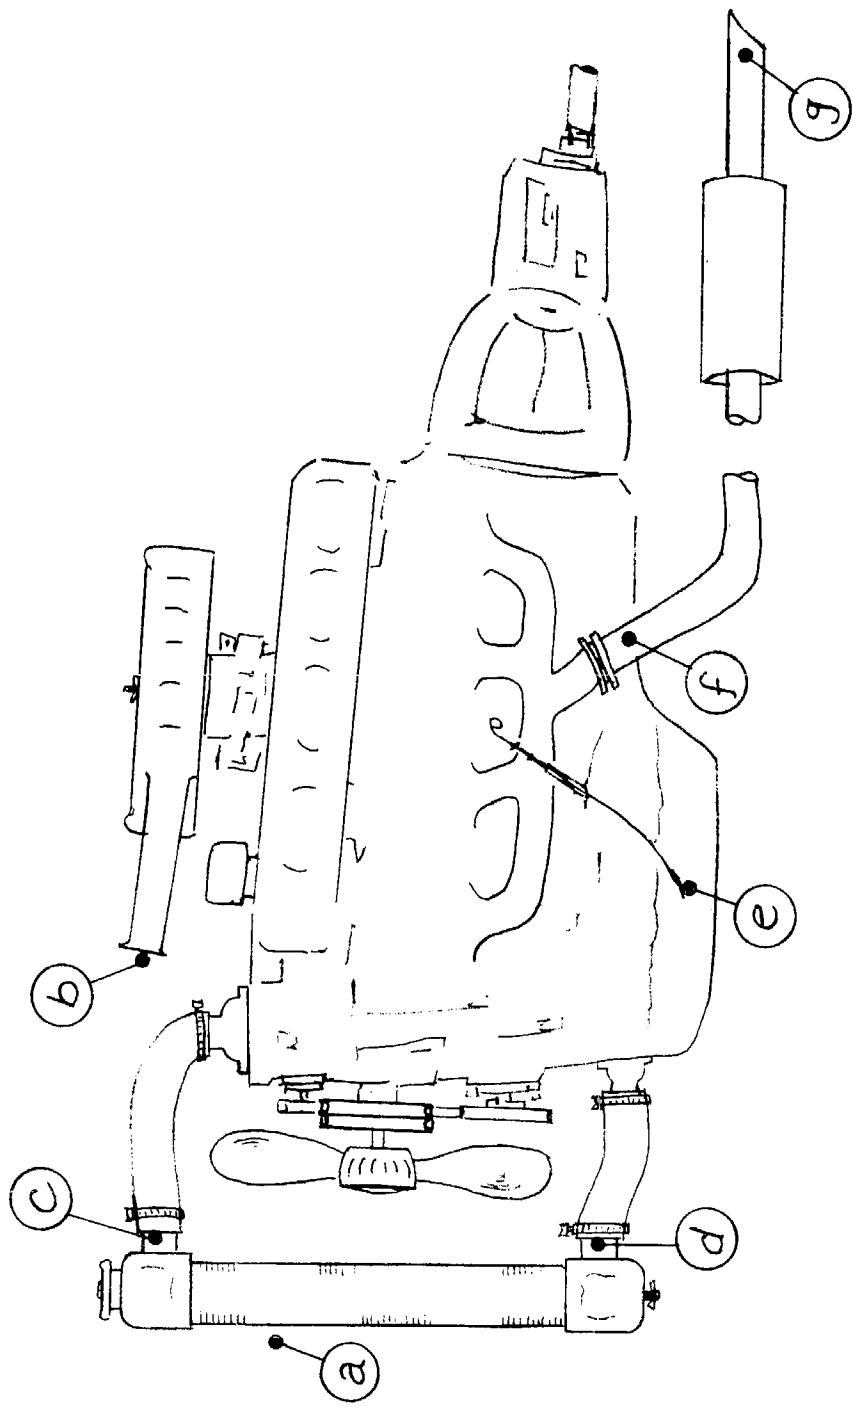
ENGINE THERMOCOUPLE INSTALLATION
